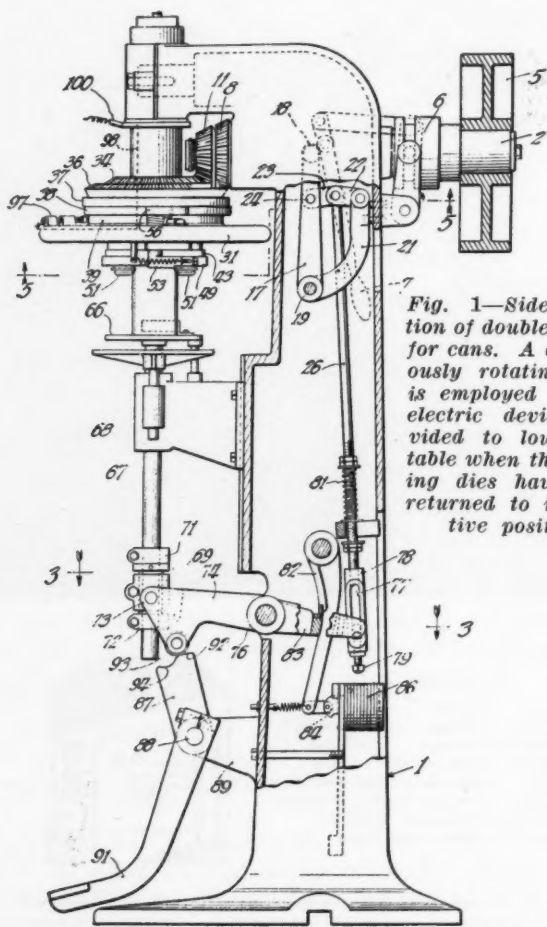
Side elevation of double seamer for cans. A continuously rotating head is employed and an electric device provided to lower the table when the seaming dies have been returned to inoperative position
